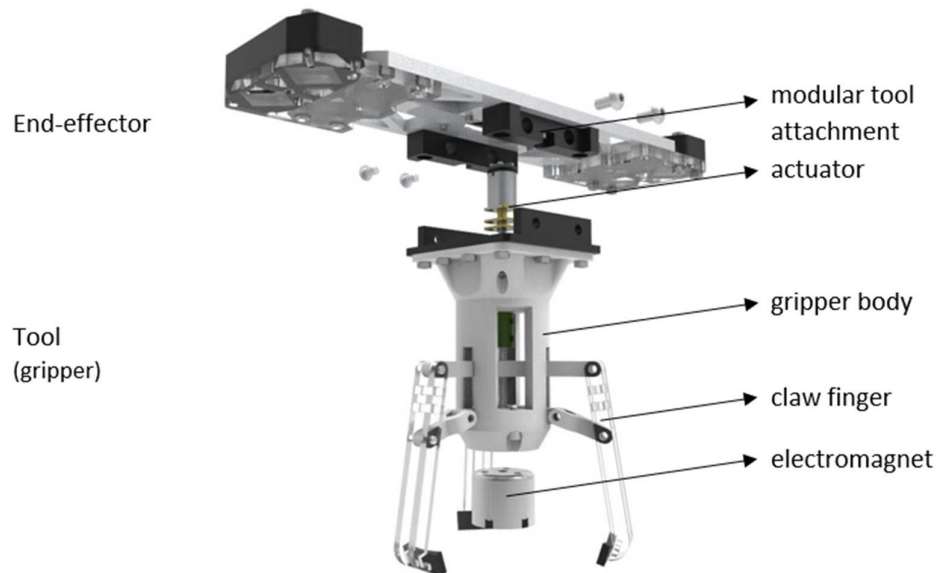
Exploded view of the SCALA manipulator end-effector with gripper.
